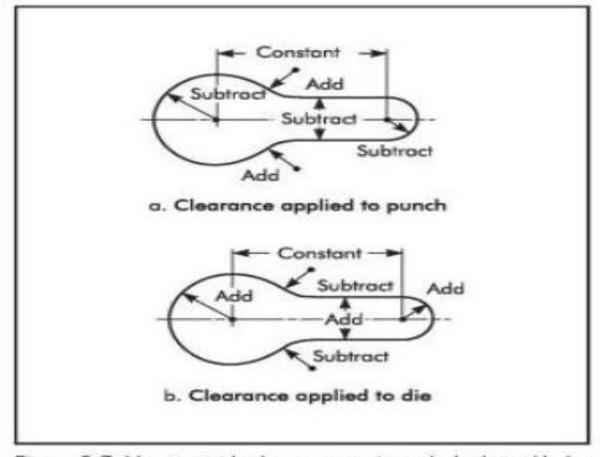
How to apply clearances to irregularly shaped holes (Paquin 1962).
